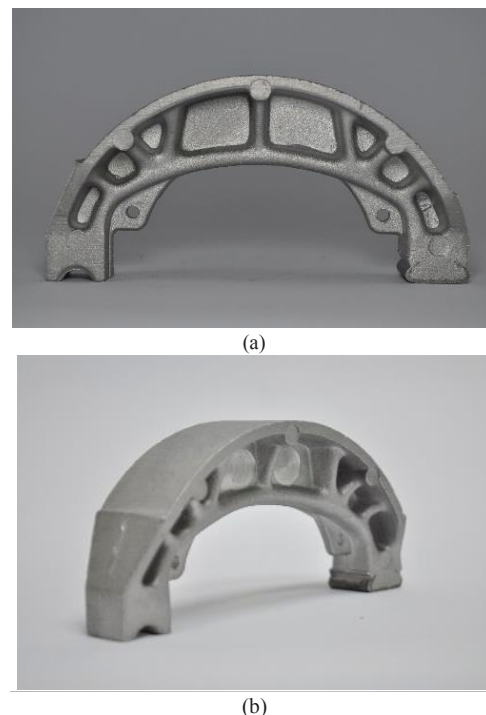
(a,b) A motorcycle brake shoe from die casting process.
